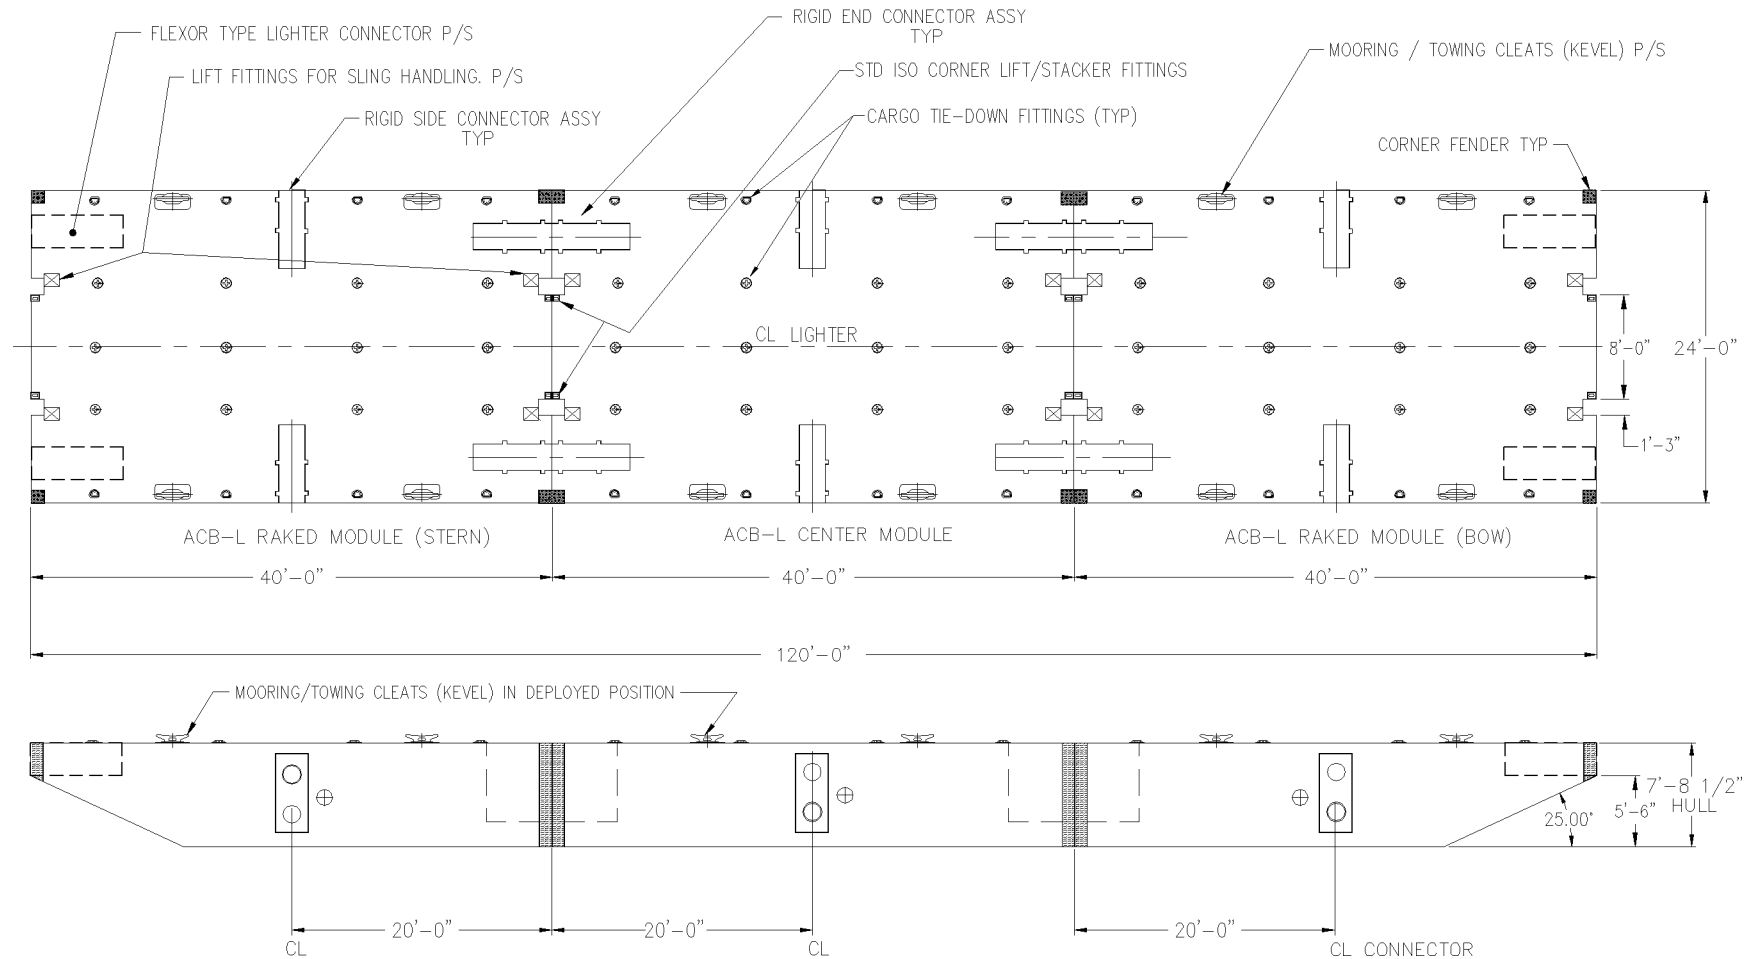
Modular ACB Lighter General Arrangement & Key Dimensions
